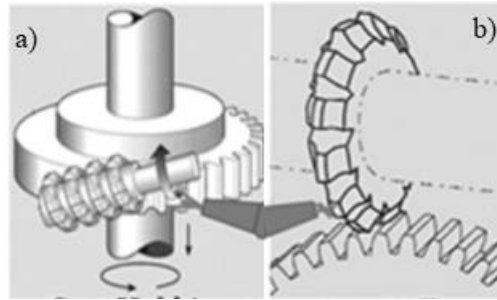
6 - a) gear hobbing b) gear milling [4]
